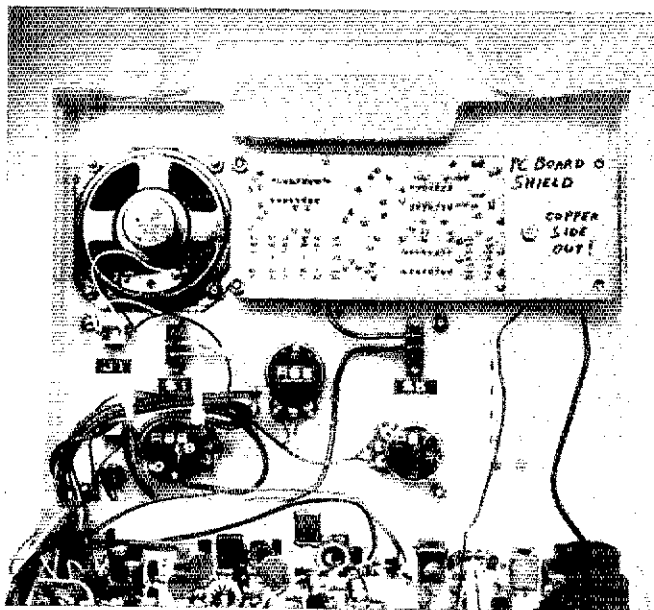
An inside view of the cover section of the BP-80. The DR-1A display board occupies the top right-hand section. Note the ventilation holes drilled in the cover. See text for an explanation of the PC-board shield. The push-button key is located at the bottom left, with the key jack (partially hidden by the wiring harness) immediately above it.
